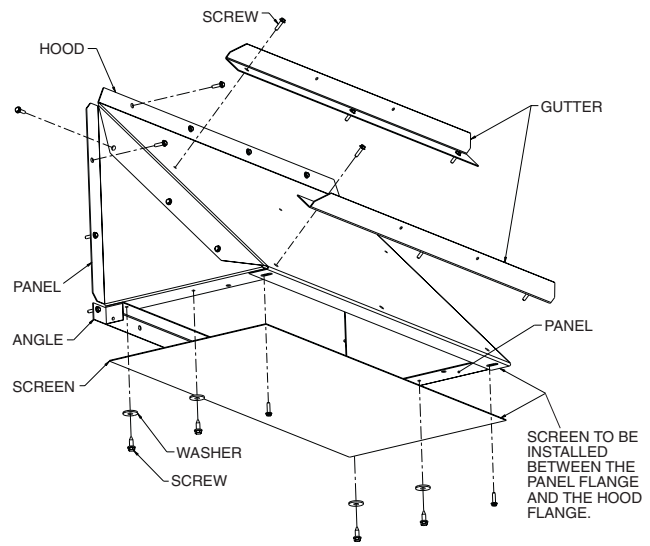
Collapsible Exhaust Box Hood (Assembly)
